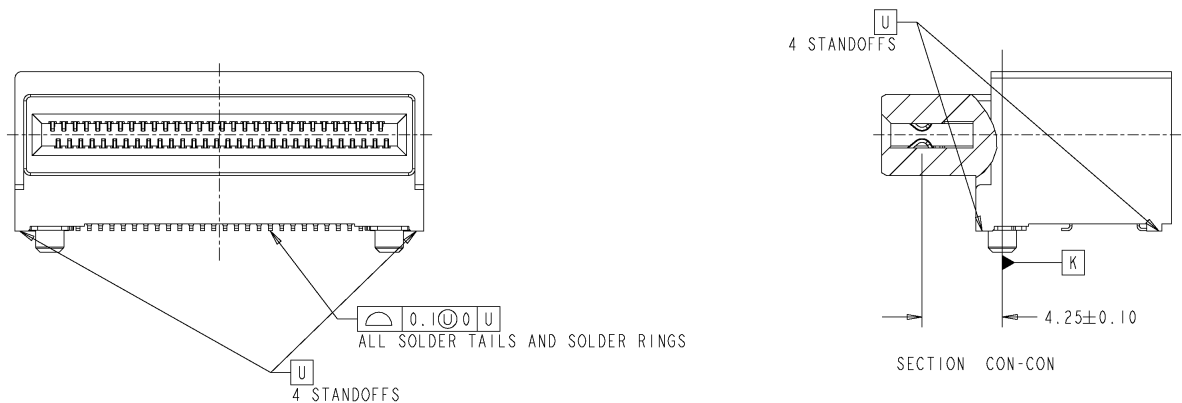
OSFP1600 SMT connector, datum and contact location
